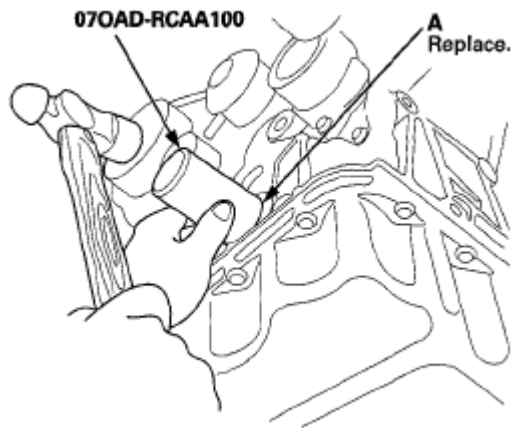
Driving In Crankshaft Oil Seal Until Oil Seal Driver Bottoms On Oil Pump
